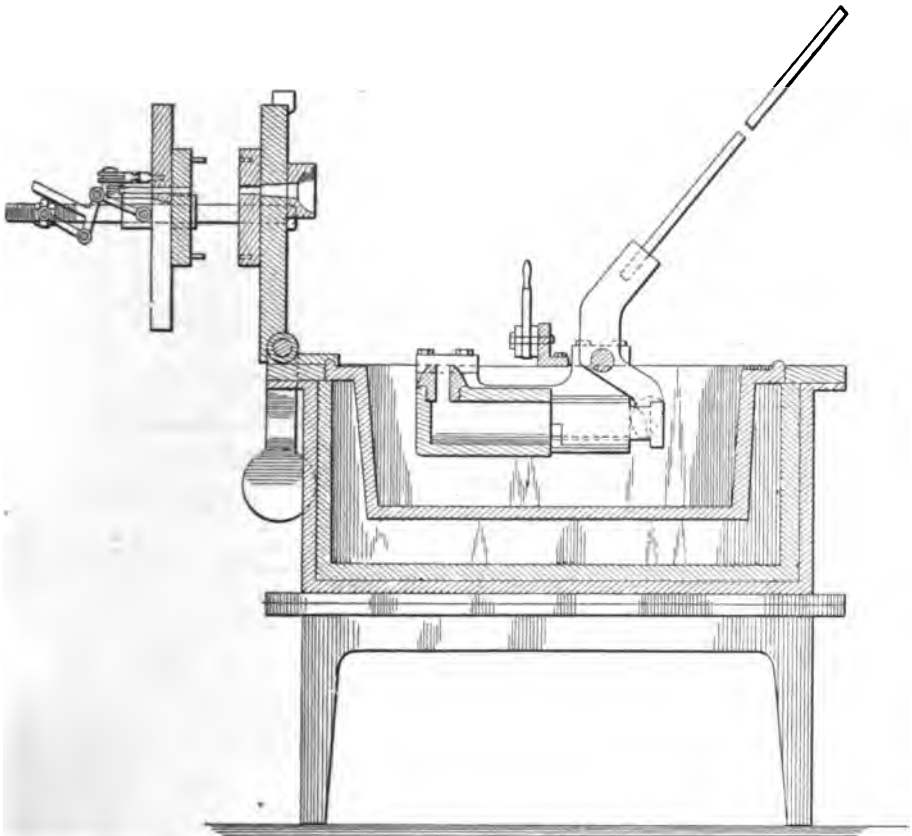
EARLY TYPE OF DOEHLER MACHINE.
